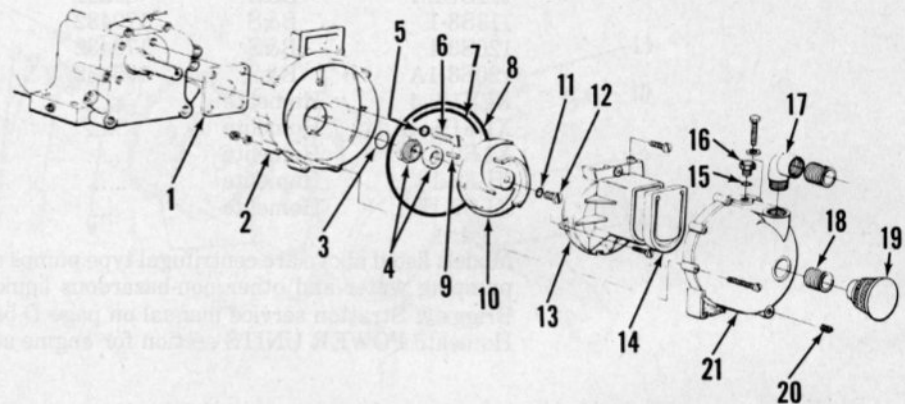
Exploded view of AP series centrifugal pump.
